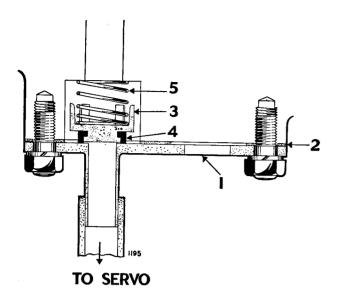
Sectioned view of the 3.4 litre vacuum check valve.
